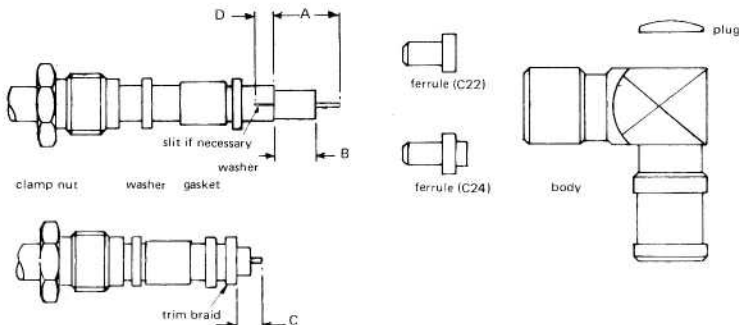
Elbow plugs, pressure sleeve cable clamp
